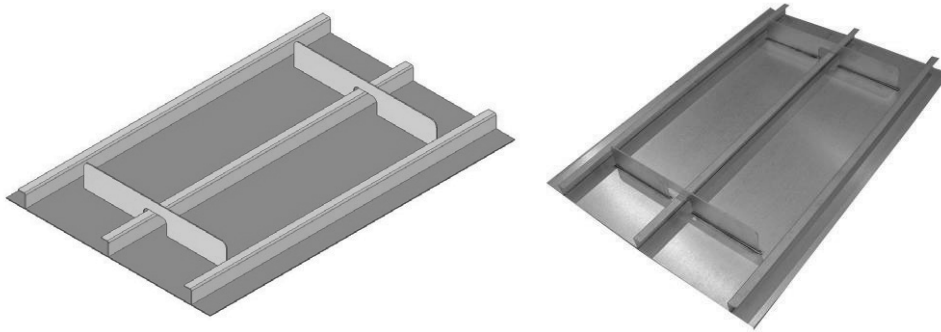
Demonstrator for integral fuselage welded of high strength alloy 2198, CAD sketch (left), laser welded demonstrator with three stringer and two clips, 430 x 650 mm² (right)
